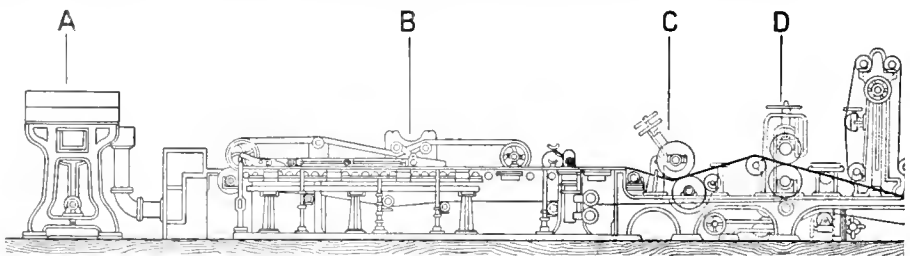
FOURDRINIER MACHINE IN SECTION.
